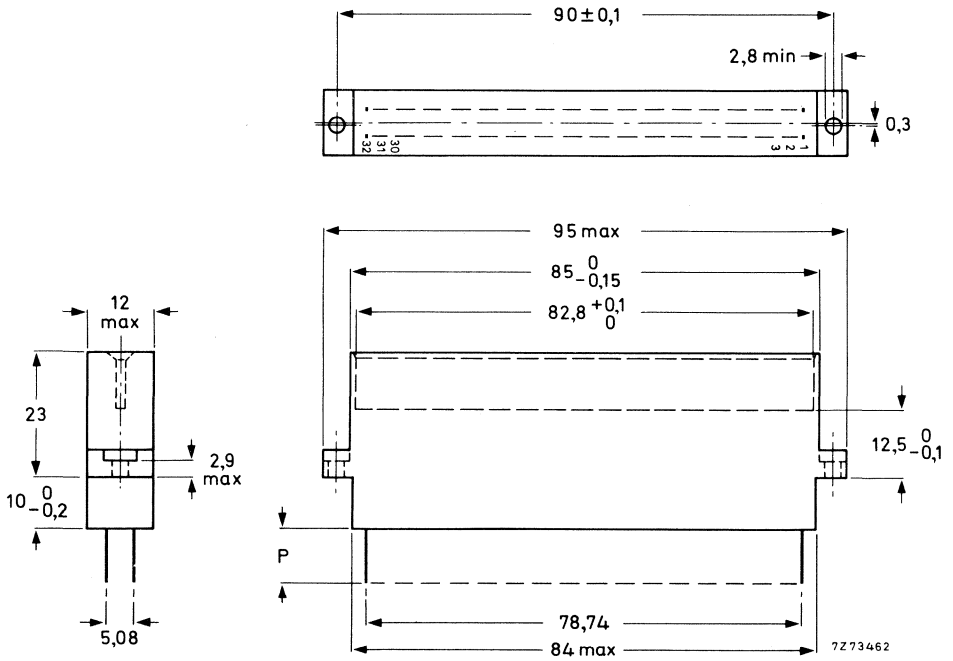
Dimensions of connector types F and G (DIN 41613).
